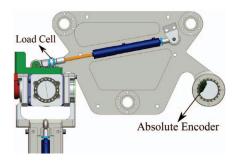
CAD model of the HAA joint: the cylinder is connected on top of rotary actuator.
